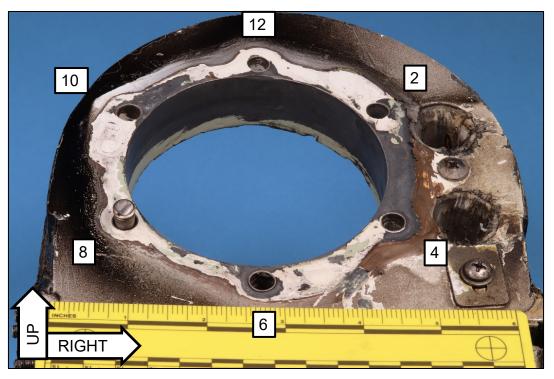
Upper aft surface of the vertical stabilizer after cleaning showing the mounting face for the 90° gearbox assembly.
